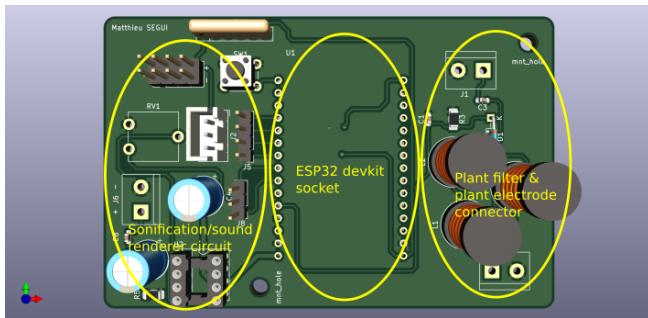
Front 3D rendering of the built PCB. The rendering is done using open source software: Kicad
